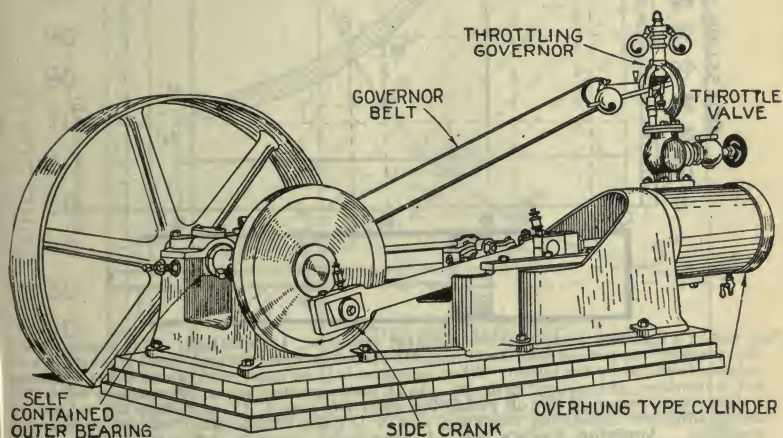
The Houston, Stanwood, and Gamble, side crank self-contained, throttling engine. The steam supply is "throttled" or varied automatically by the governor to meet load changes, the point of cut off being the same for all loads. This type of engine is cheaper than an automatic cut off engine but is not as economical in the use of steam.
